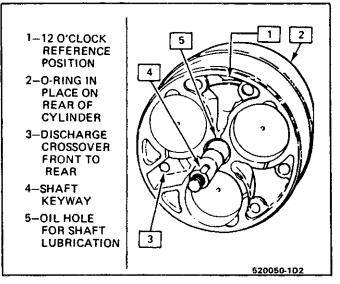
Front View and Detail of HR-6 Cylinder and Shaft Assembly
